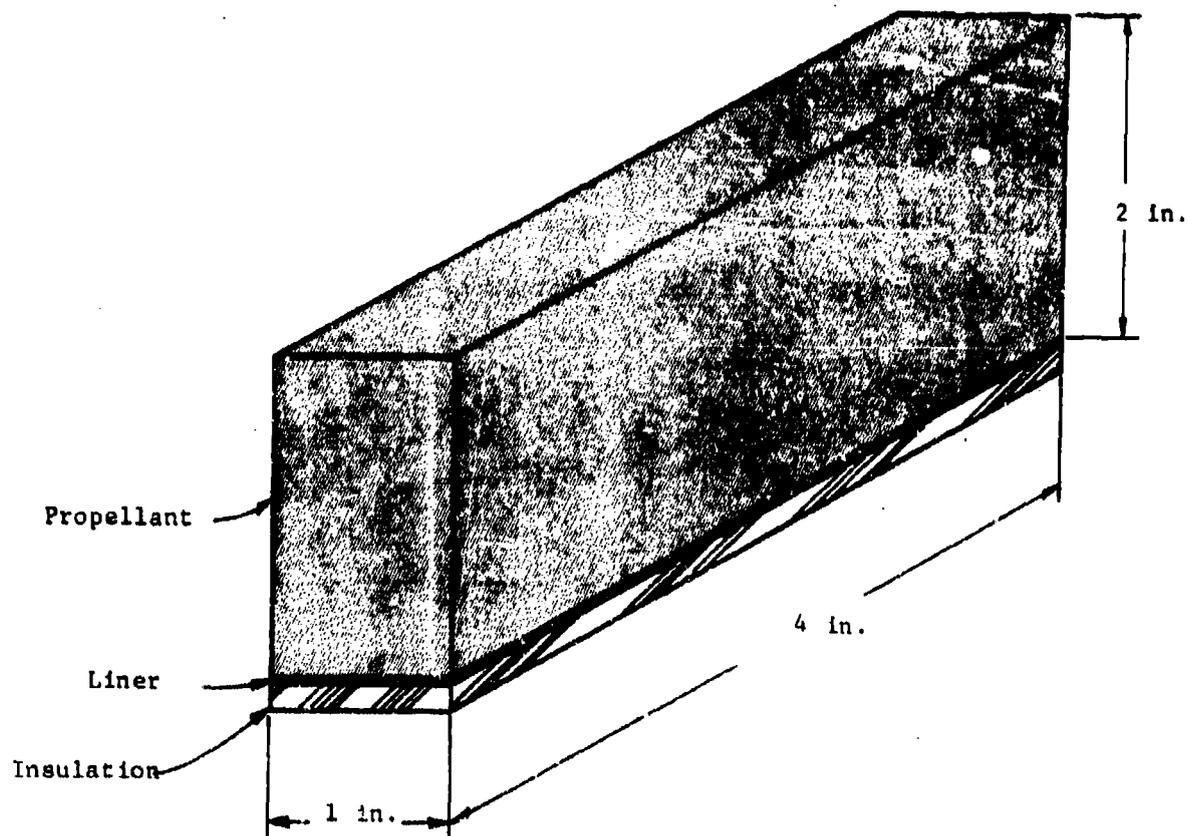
Milled or Saw-Cut Scarf-Joint Specimen
